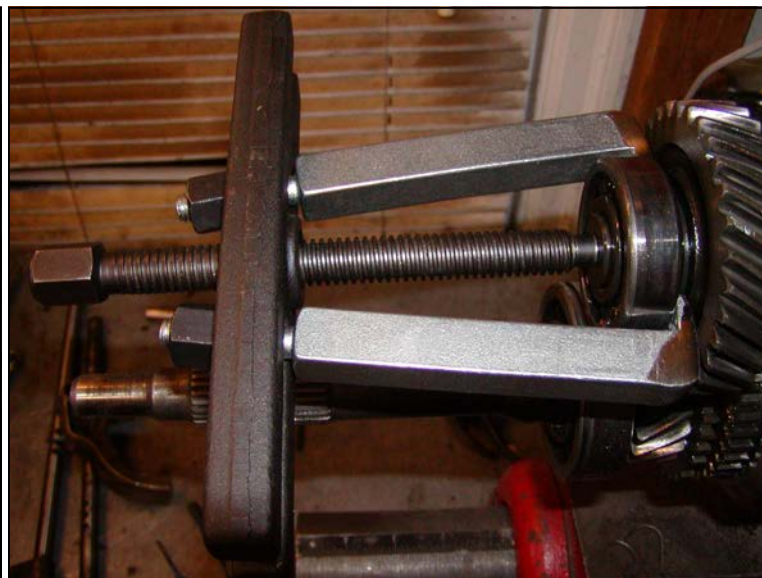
Showing the positioning of the gear puller, beginning with the countershaft front bearing.
